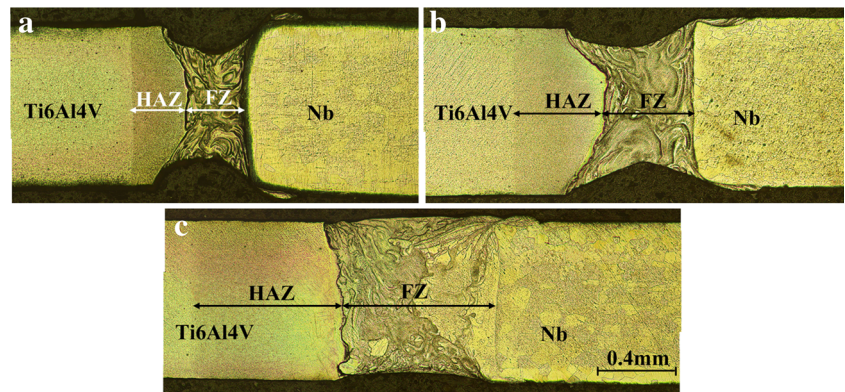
Cross-sectional morphologies of welded joints with different heat inputs. a 22.5 J mm^{-1} , b 45 J mm^{-1} , and c 67.5 J mm^{-1}
